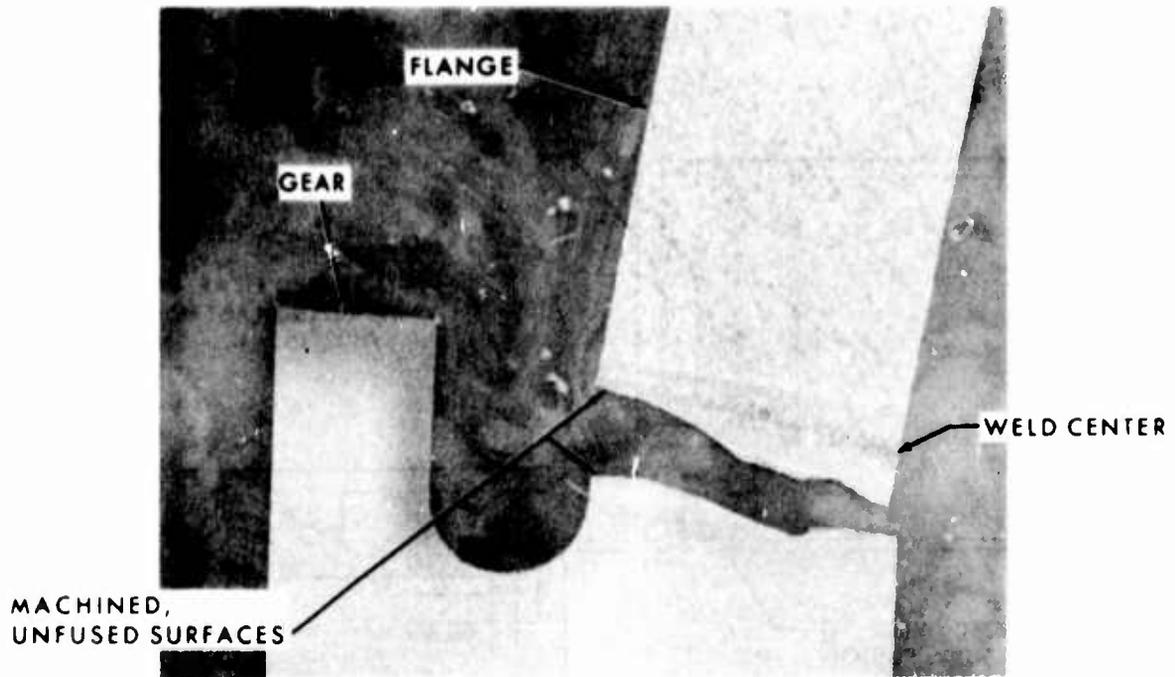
Cross Section of Second-Row Pinion Flange/Gear Weld Fracture.
